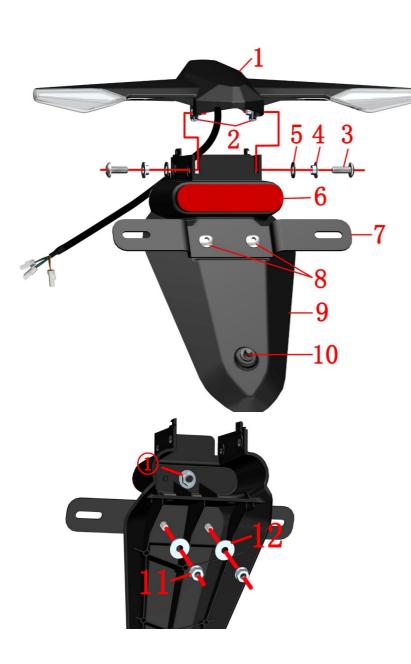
REA	AR COVER	Rear mud board assembly 2	CHK
